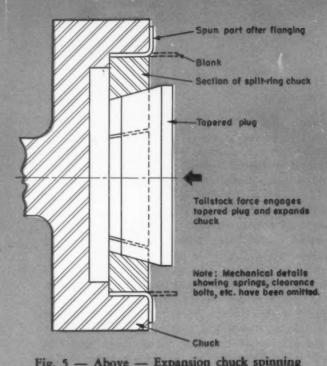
Above — Expansion chuck spinning technique. Blank may be welded cylindrical ring or rolled-up strip
